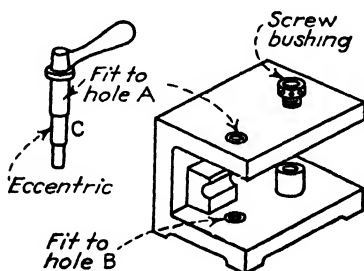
Here the work is held by an eccentric pin C, with bearings for bushings A and B. By leaving the pin loose the work can be easily removed.
